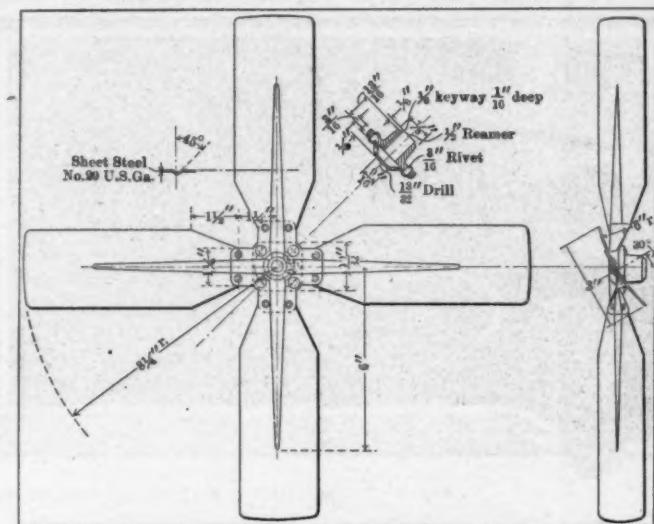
Premier fan, with four blades of pressed steel, ribbed and beaded for strength
